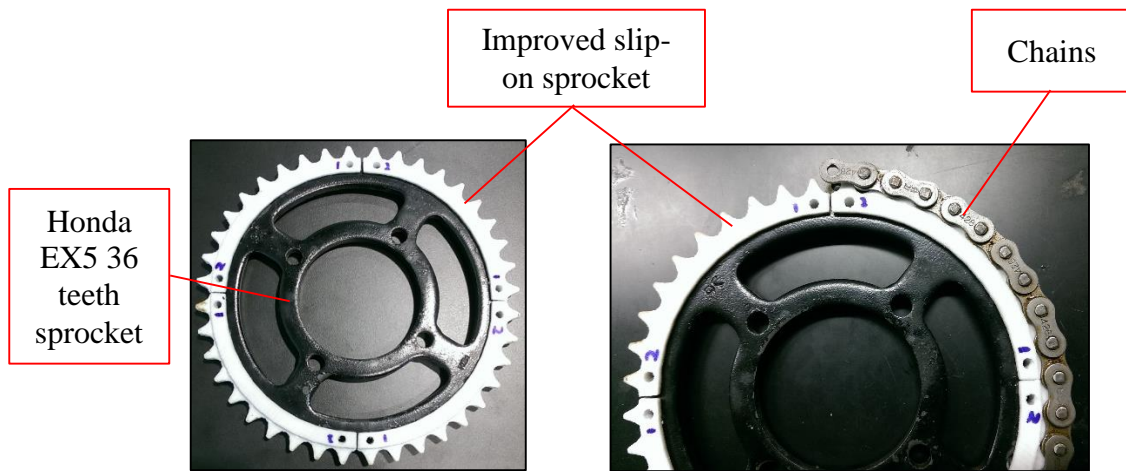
Assembly test of slip-on sprocket with 36 teeth original sprocket and chains
